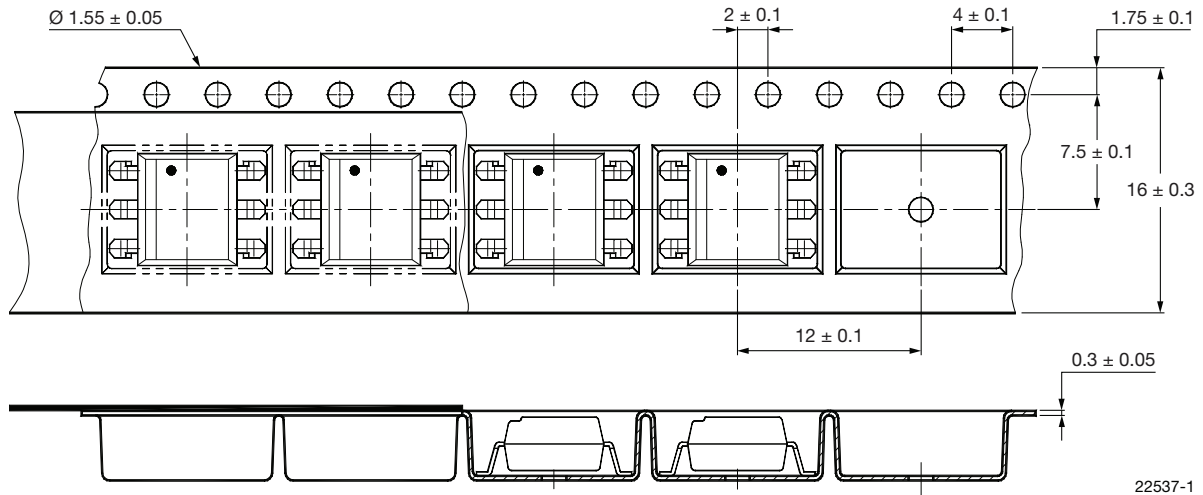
Tape and Reel Drawing, 1000 Units per Reel
